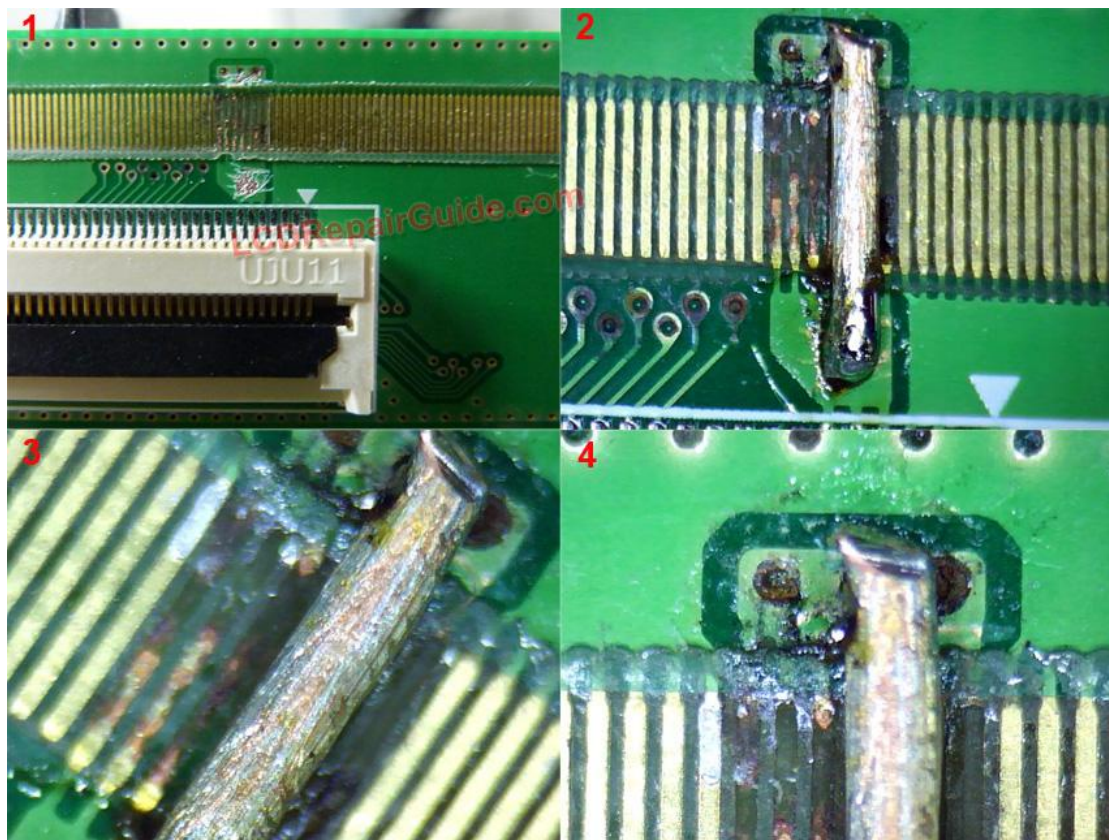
How to modify the Source PCB board after corrosion
